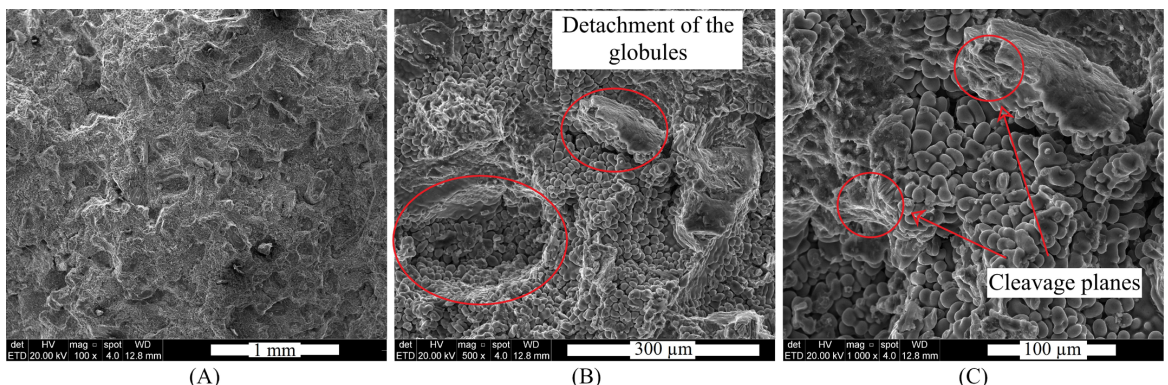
Fracture surface of the 12 mm sample mechanically stirred for 2 minutes.
